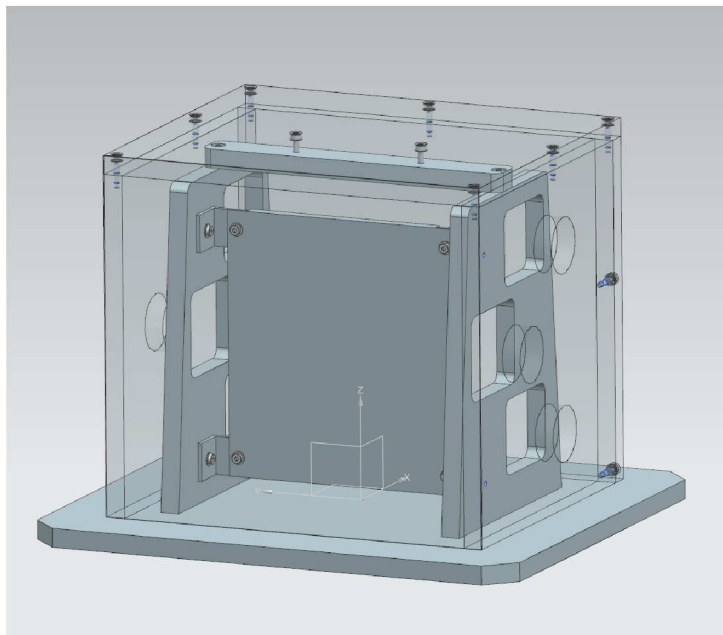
Technical drawing of the PCB holder. Courtesy: J. Stein
